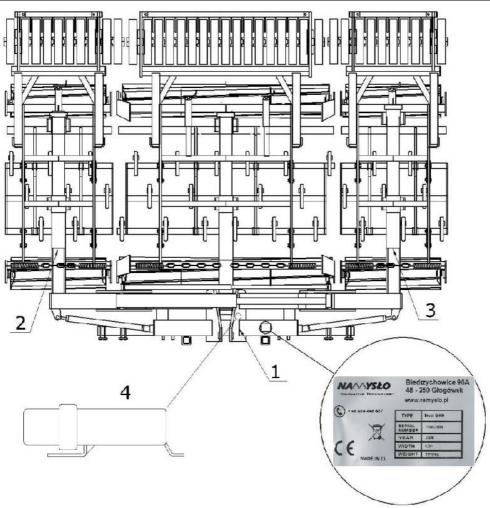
View of the SHARP seedbed cultivator with a place for mounting the type plate: 1- middle frame, 2- right frame with working sections, 3- left frame with working sections 4- tube for operating instructions.
